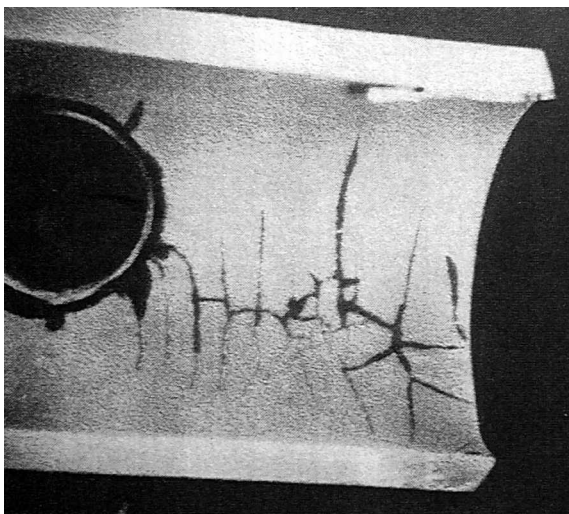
Thermal fatigue cracks (magnification 0,5X)
